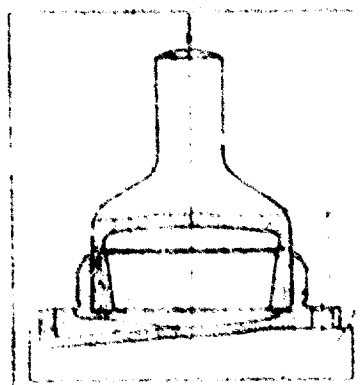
Pressing the outer race into the recess in the cylindrical driving gear shaft bearing cover
